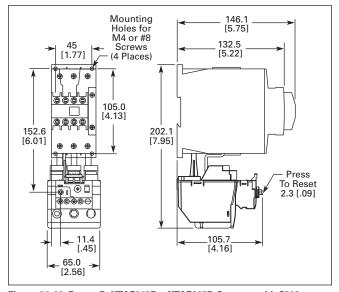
Frame D, XTAE040D – XTAE065D Starters with C396 (15 – 75A) — Approximate Dimensions in mm [in.]
